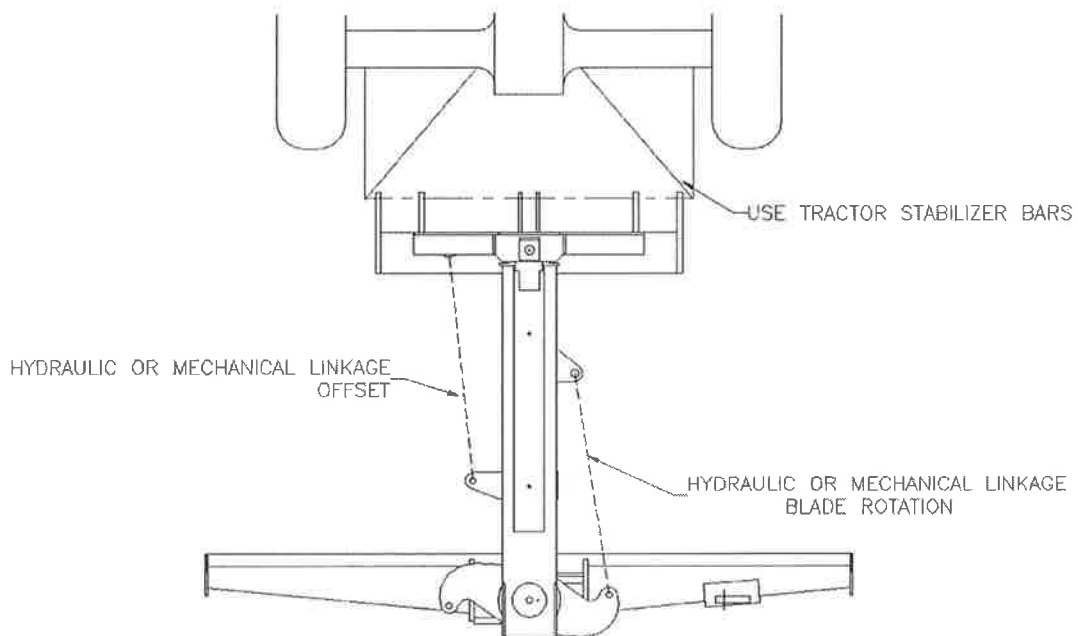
The Cutting edge angle is controlled by tractor top link adjustment.
